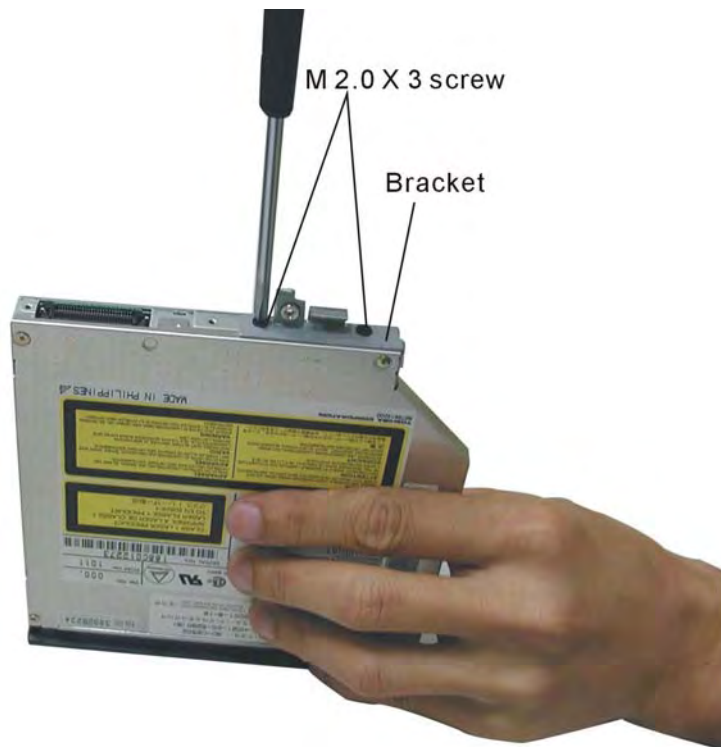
Removing the CD-RW/DVD-ROM or CD-ROM/Combo drive bracket
